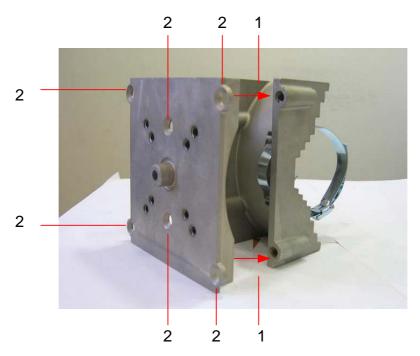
Attaching the Back Plate to the Pole Bracket
